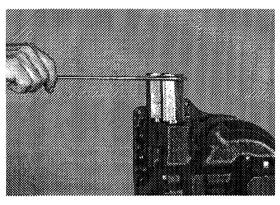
Install housing over sleeve and spring assembly and tighten to 60-65 LBF-FT [81-88 N.m].
